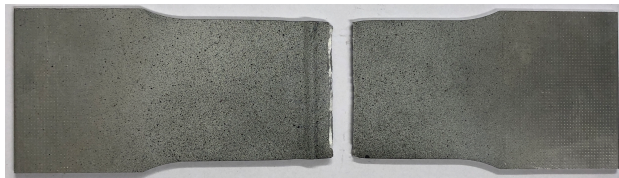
Fractured specimen with laser pattern, without PWHT.
